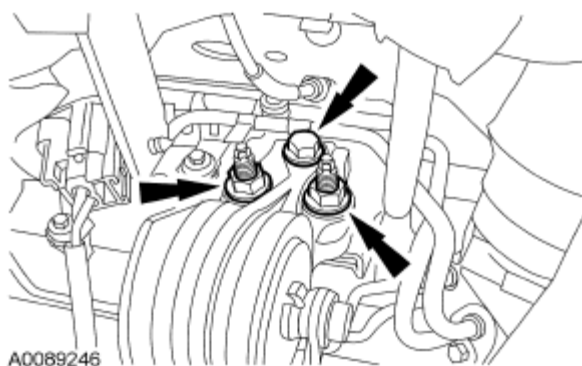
Locating RH Transaxle Support Insulator Nut & Bolts
